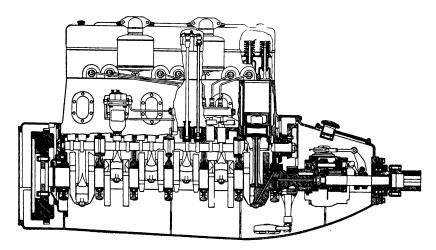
A.—Superior High-Speed Marine Diesel, Model A.
